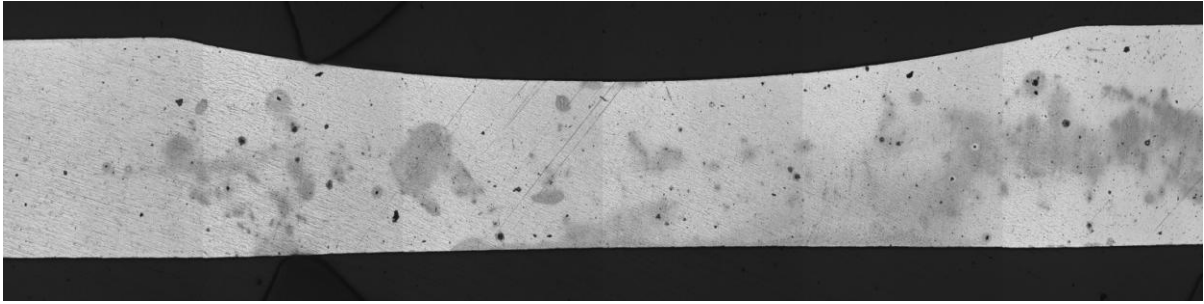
Diode laser weld transverse section made at 3 kW and 0.13 m/min on 2 mm thick sheet.
